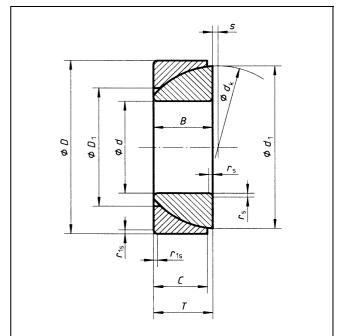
Angular contact radial spherical plain bearing, dimension series A
